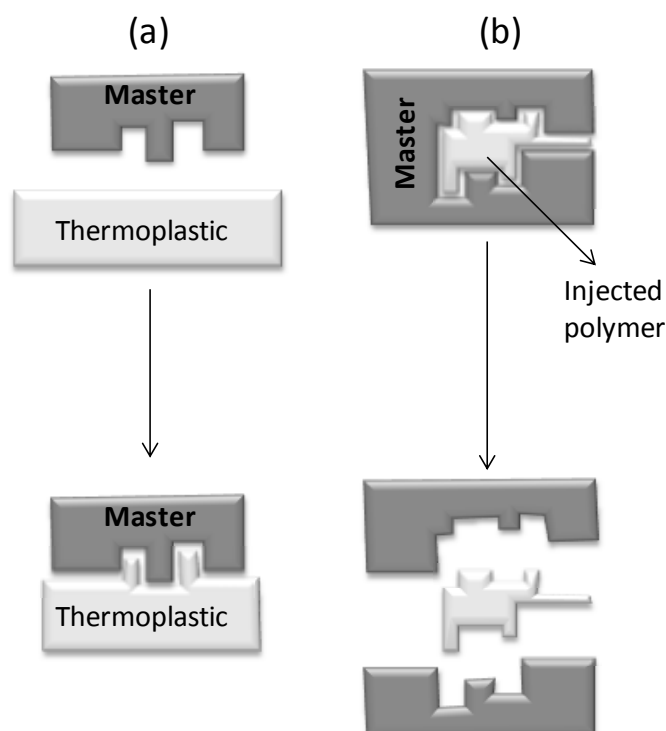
Fabrication process by (a) hot embossing and (b) injection molding.
